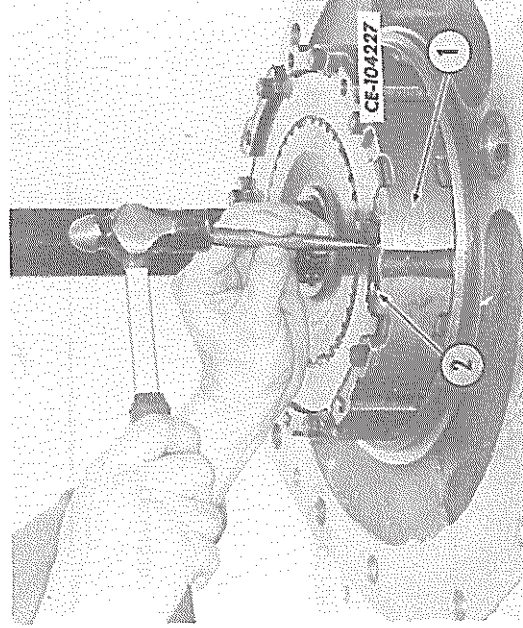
Marking the Retainer Mounting Bolt Holes
